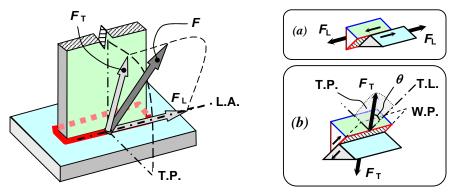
Longitudinal and Transverse Load Components on Weld F - Weld force per unit length;  $F_L$  - Longitudinal Component;  $F_T$  - Transverse Component; L.A. - Longitudinal Axis; T.P. - Transverse Plane; W.P. - Weld
